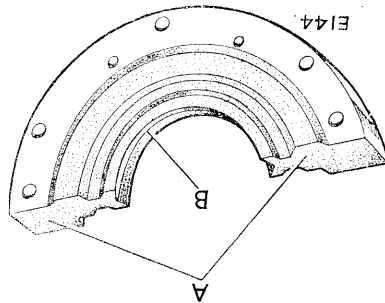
Rear crankshaft oil seals—2-piece type
